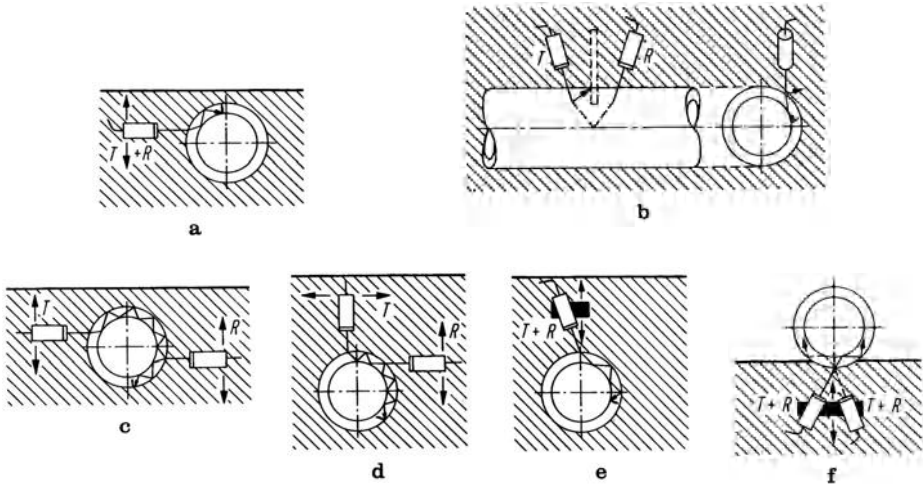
Tube testing with full or partial immersion techniques. a One-probe method; b method according to Terry; c, d according to Zöllmer and Grabendörfer; e according to Pause and Schlengermann; f double-probe technique with multiplexing using partial immersion
